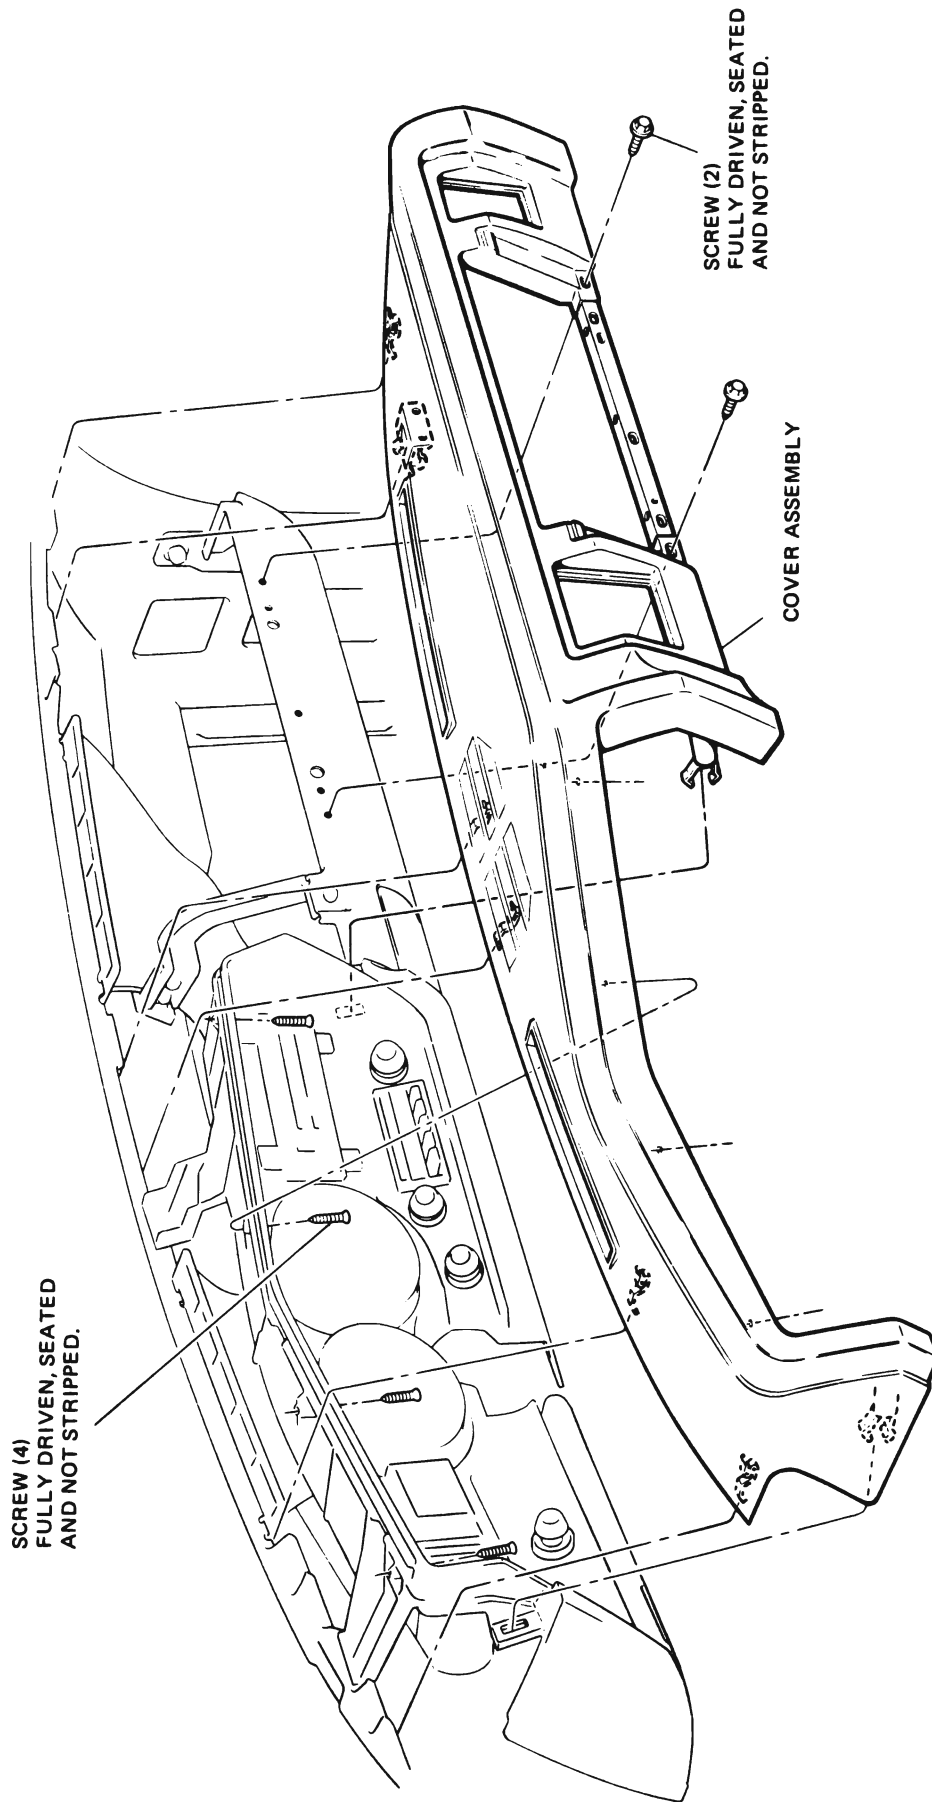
C-41 Instrument Panel Cover Assembly "A" Series
